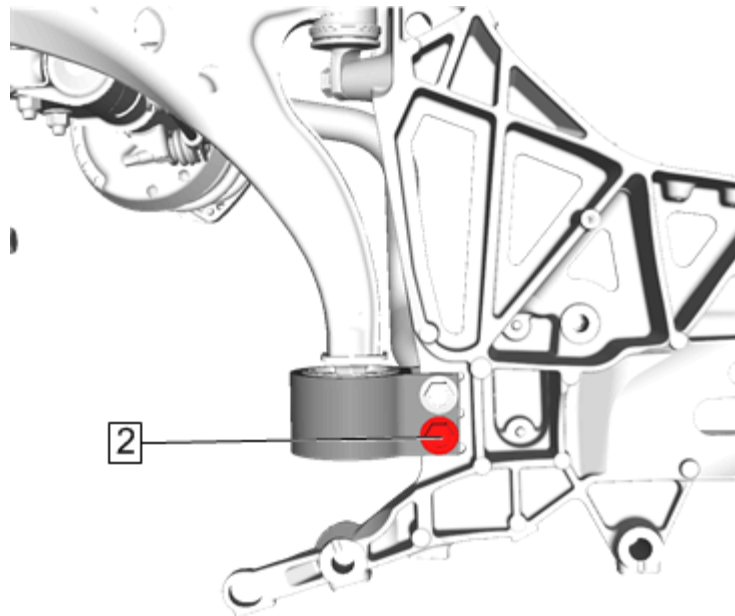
Front Lower Control Arm Rear Bushing Rear Attach Bolt Head Surface
